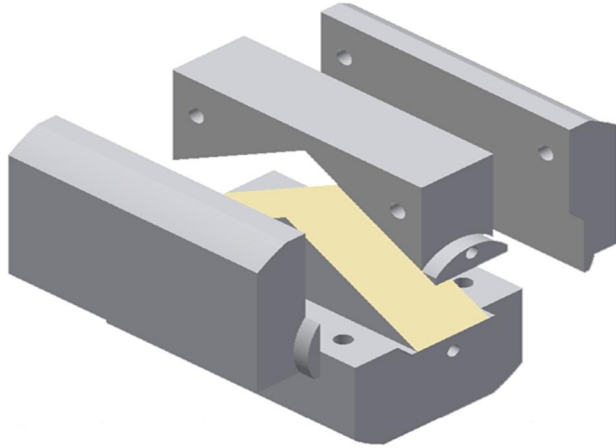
3D design of the four-reflection linear polarizer consisting of four parts assembled together.
